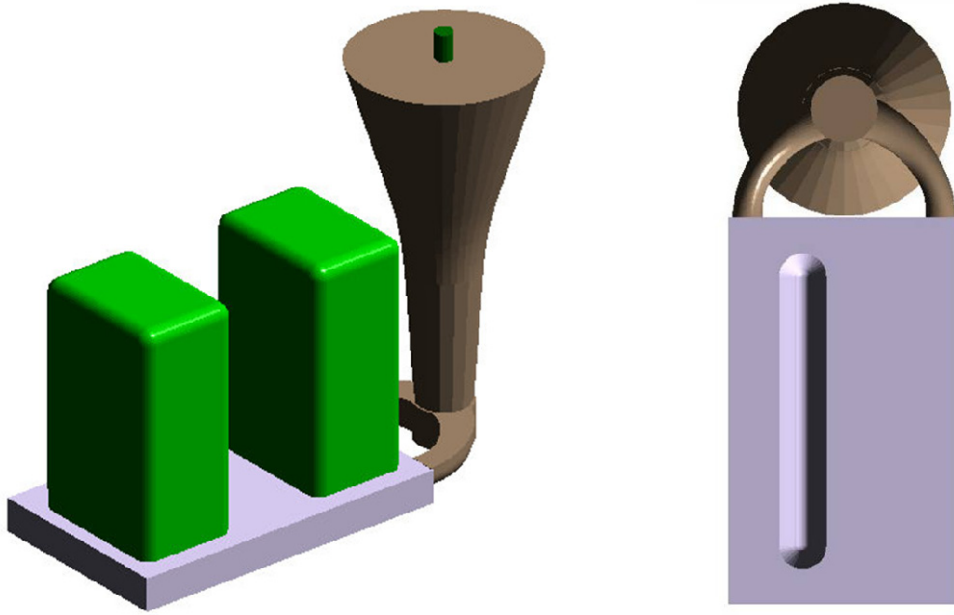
Two views of the weld plate steel casting used in the experiments.
